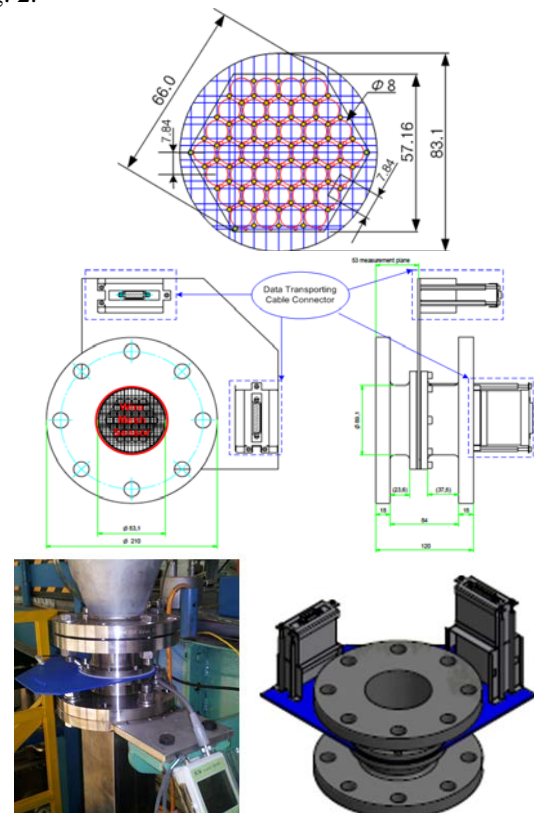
Design of wire mesh sensor: measurement points, schematics, and an assembled image.
